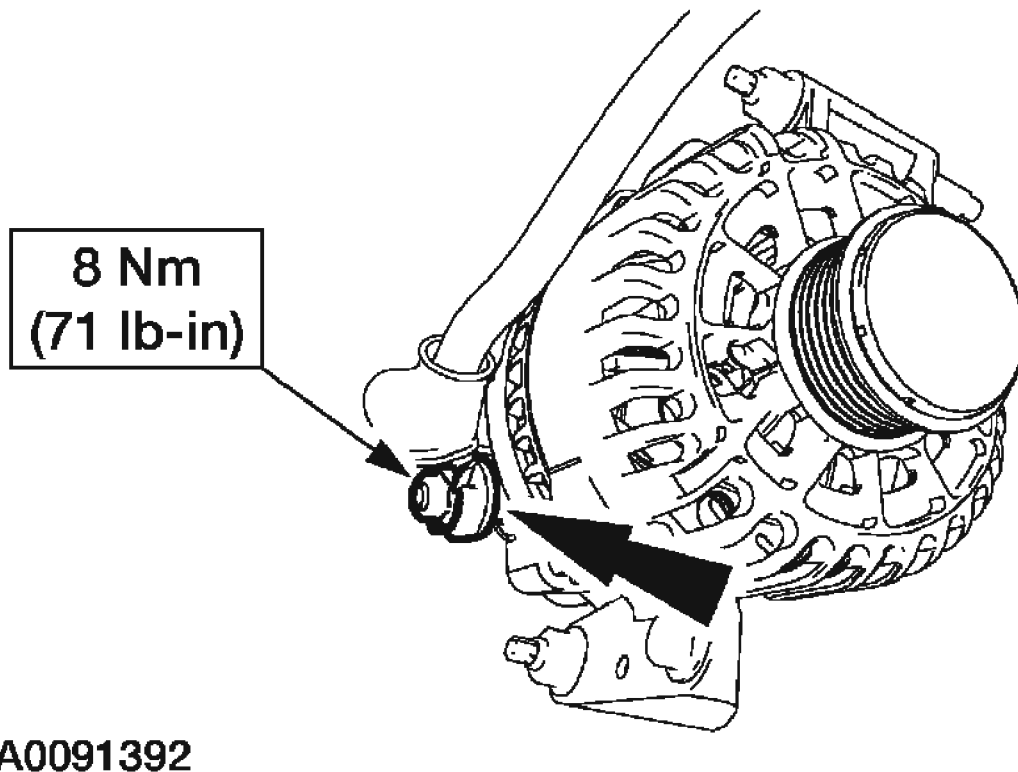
Removing Generator B+ Terminal Nut And Terminal
